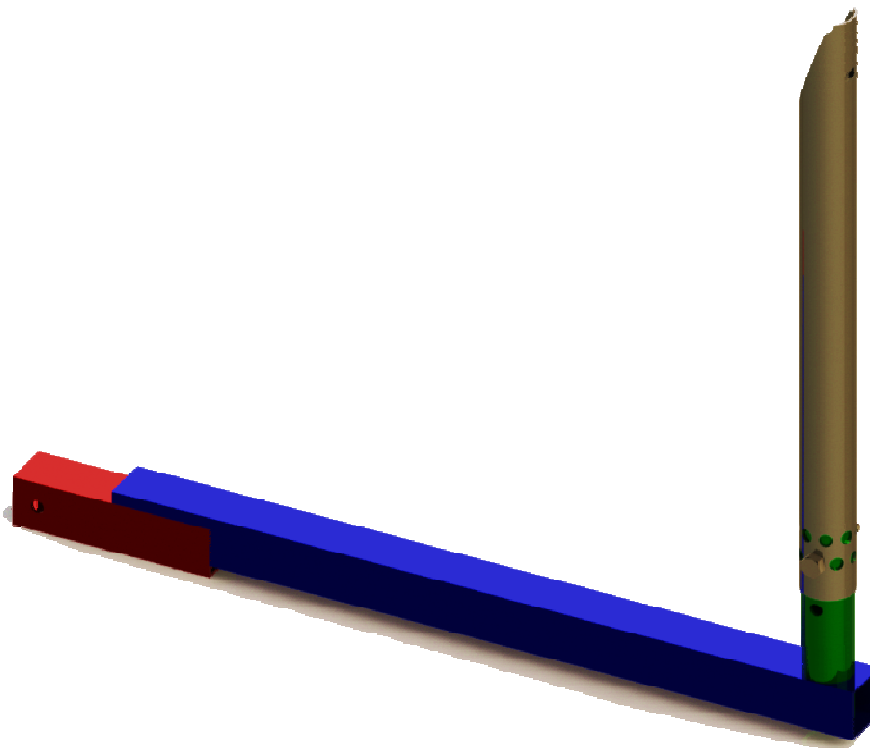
TRAILER HITCH ATTACHMENT ASSEMBLY
